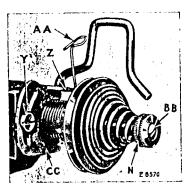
ADJUSTMENT OF THE THREAD TAKE-UP SPRING
